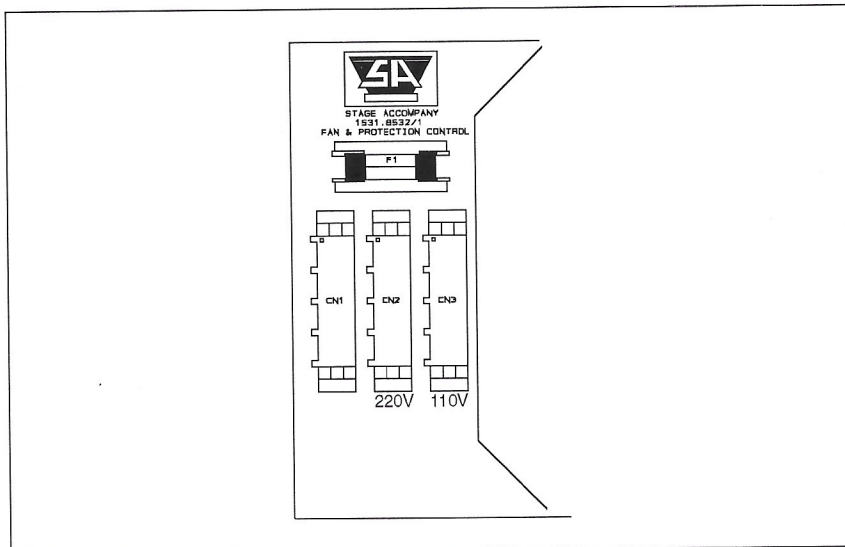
Location of the connectors and the fuse holder on the PCB.
